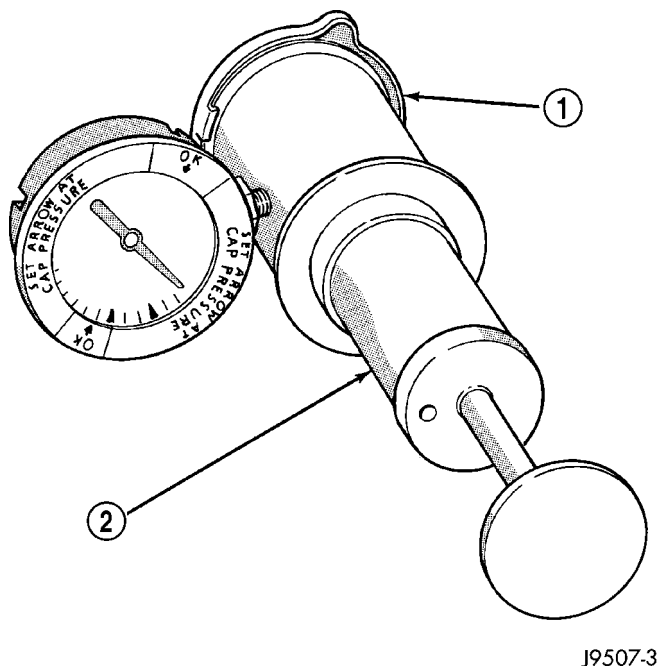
Pressure Testing Radiator Pressure Cap - Typical
